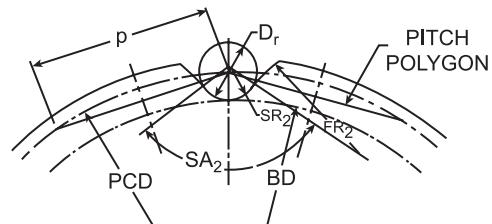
Notation for minimum tooth gap form of roller chain.
